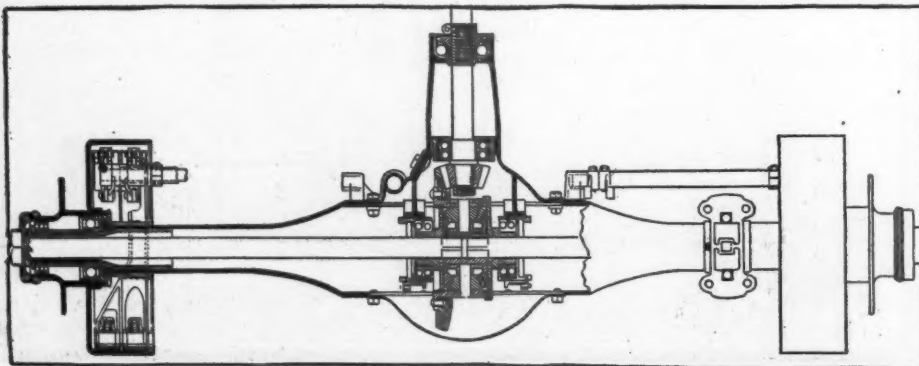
FLOATING AXLE OF HESS SPRING AND AXLE CO.
